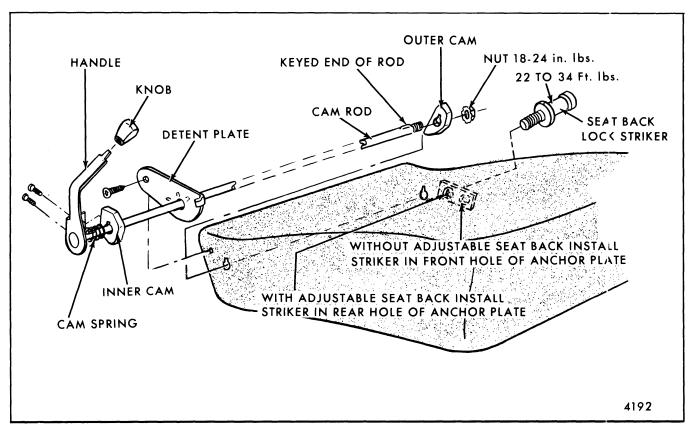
Adjustable Drivers Seat Back Handle, Cams, Cam Rod, Detent Plate and Spring Removal and Installat on from Seat Cushion - Chevrolet "F" Styles
